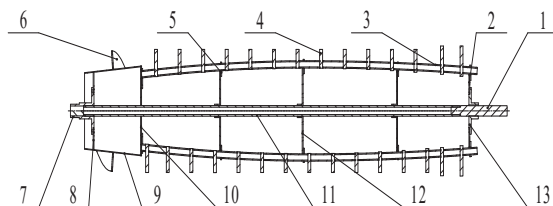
Structure of the drum-shape bar-tooth longitudinal axial flow threshing cylinder. 1. Shaft head; 2. Trailer wheel; 3. Drum-shape bar-tooth; 4. Threshing teeth; 5. Bar-tooth mounting plate; 6. Spiral blade; 7. Front flange; 8. Front disc; 9. Conical cylinder; 10. Rear disc; 11. Shaft tube; 12. Middle wheel; 13. Rear flange.
